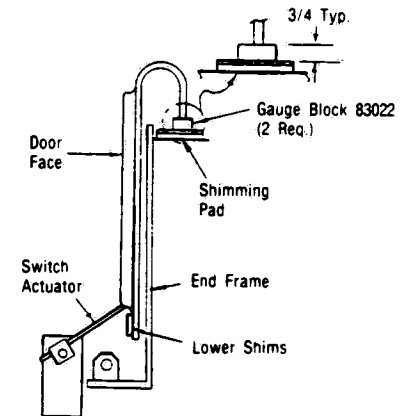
ADJUSTMENT OF DOOR LIMIT SWITCHES.
